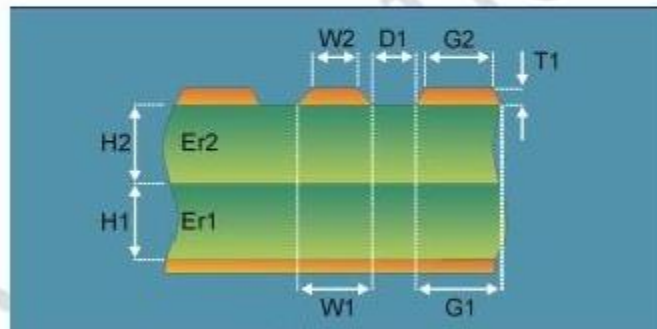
Multi-layer PCB board common-planar waveguide structure (reference for the third layer)
